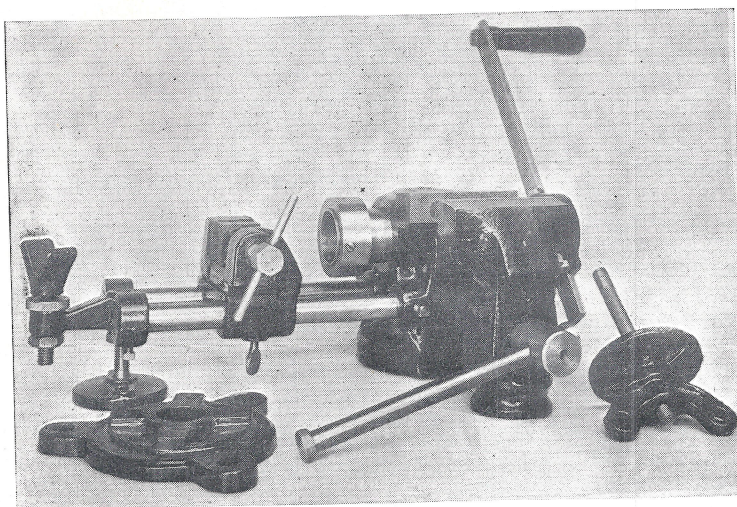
The "101" Combination Vice, showing Screwing Gear, and attachments to Bench.
